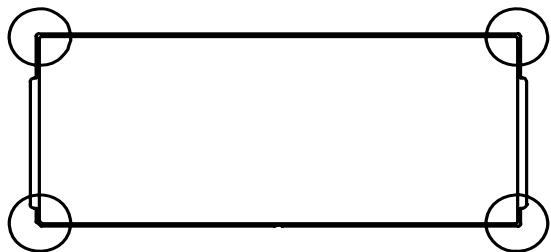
Top view of a tray showing the measurement locations for the outline dimensions
